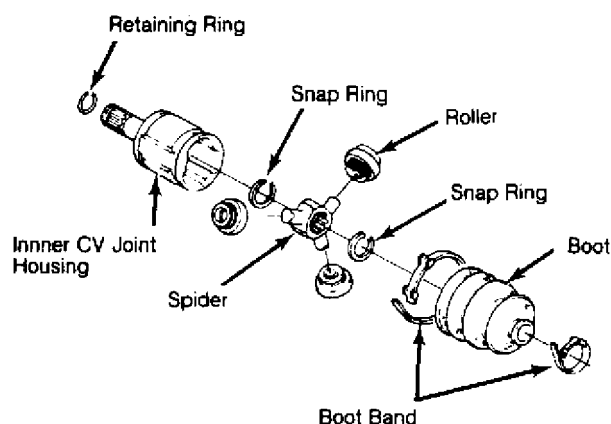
Exploded View Of Inboard CV Joint Assembly (Typical)
